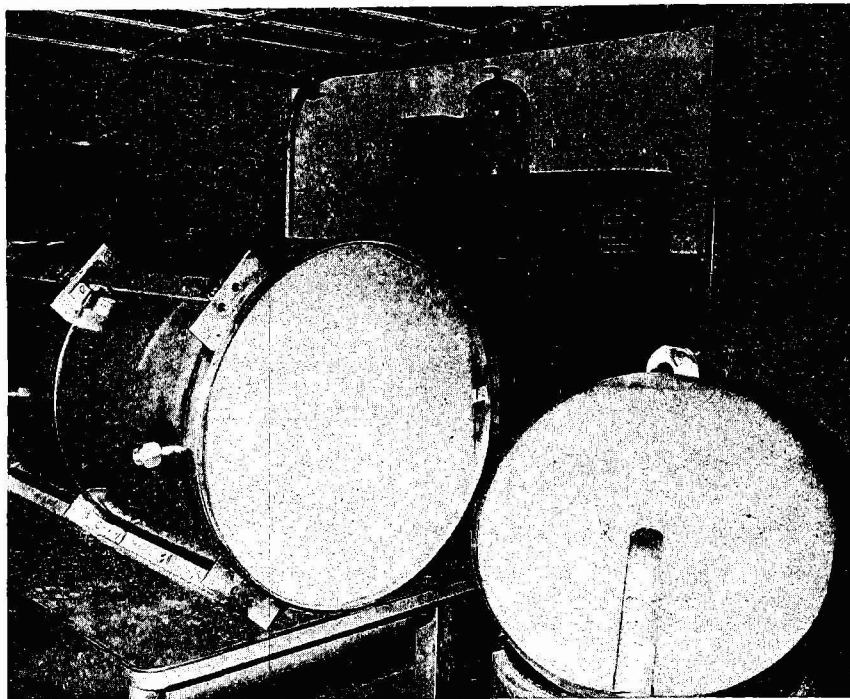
Foam-Packed Tank Before Making Final Weld
